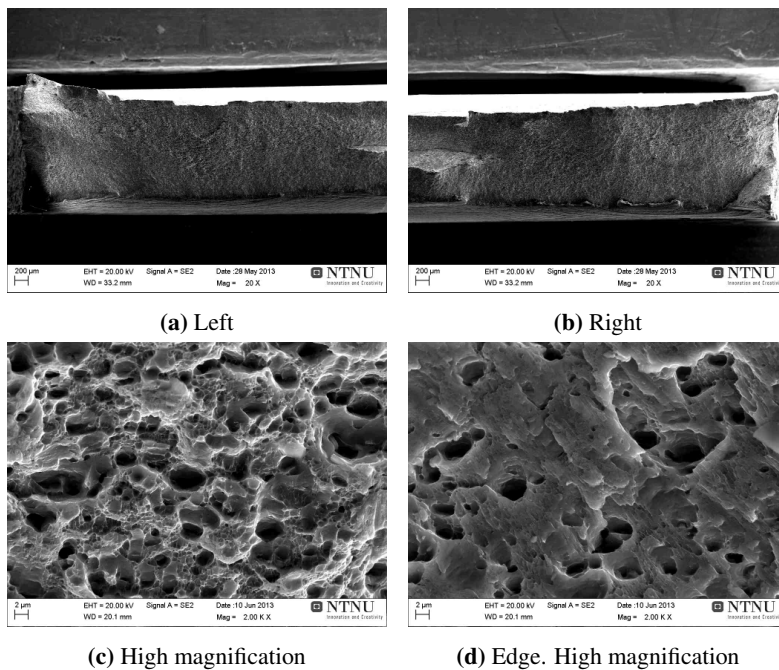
Fracture surfaces of the HAZ/TMAZ tensile specimen representing the longitudinal direction.
